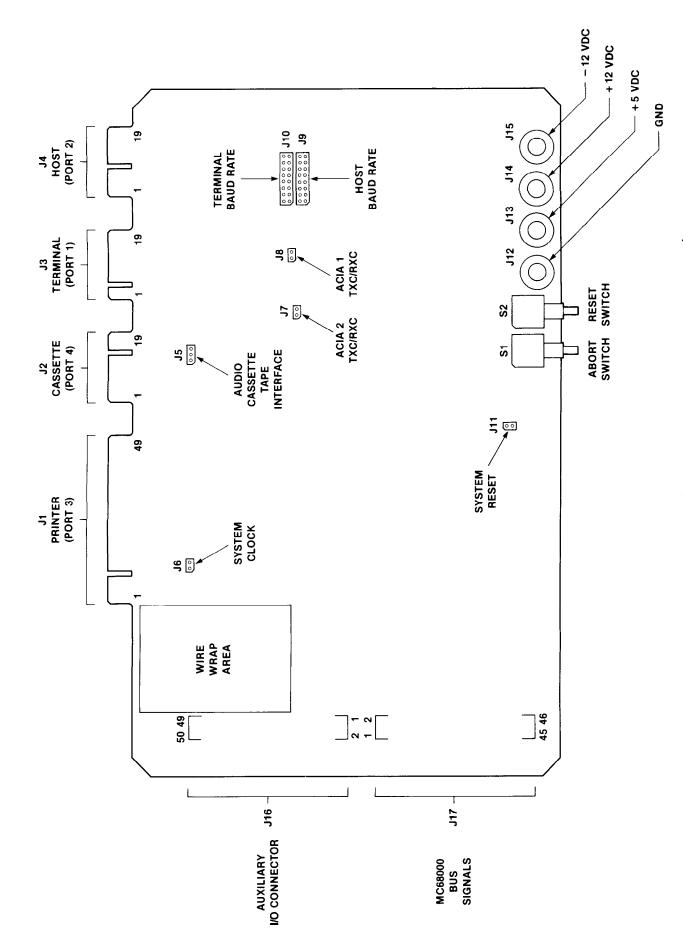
MEX68KECB Header, Connector, and Switch Locations
